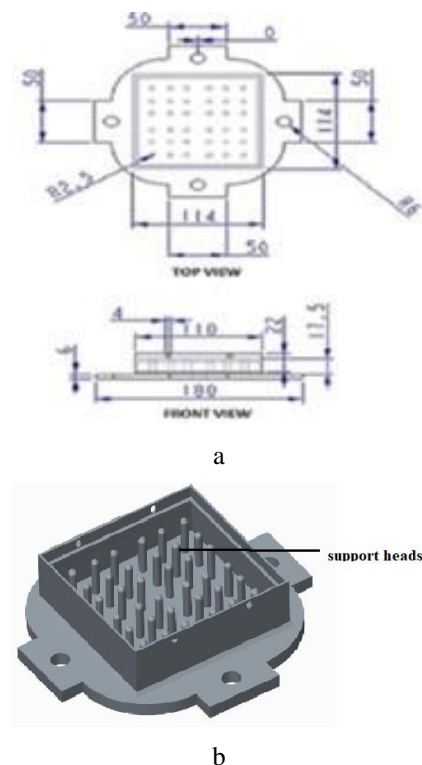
Fixtures: a) CAD drawing of fixtures with support heads; b) solid model of fixture design
